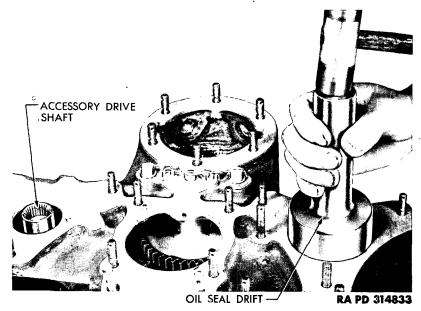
Driving in Magneto Oil Seal Using Drift 41-D-1460
